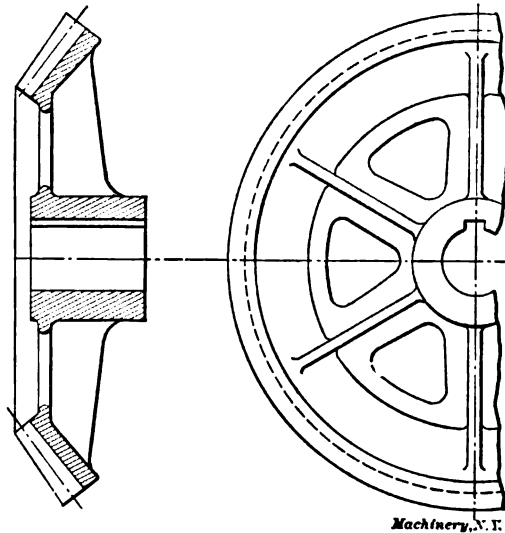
T-arm Style of Bevel Wheel for Heavy Work
